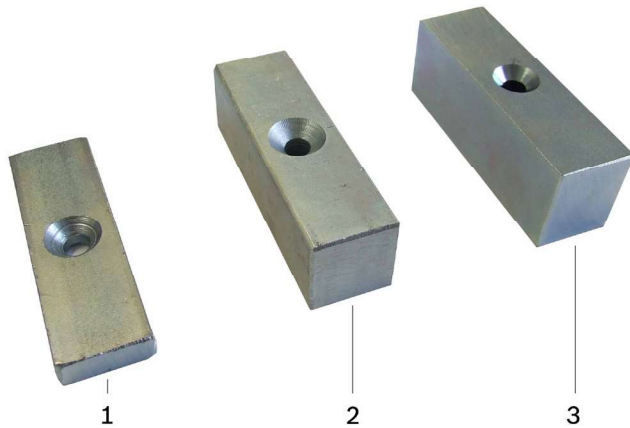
Spacers with different heights mounted on the bottom of the roller set
